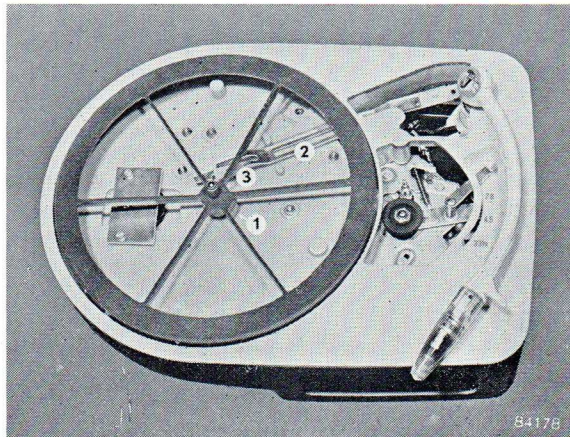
shows a record player type AG 2004. The motor, of the type already described, has a vertical shaft with a „stepped” roller at the upper end. A lever is provided to raise and lower the idler wheel and lock it in any of 4 positions. In the bottom position this wheel is clear of the roller and the rim of the turntable, and in the next higher position it rides against the thickest part of the roller to drive the turntable at 78 r.p.m. The motor with the idler wheel, and the lever with its
